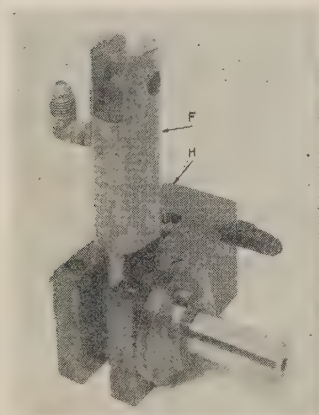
ASSEMBLY OF SUPPORT AND TEST BEARINGS
